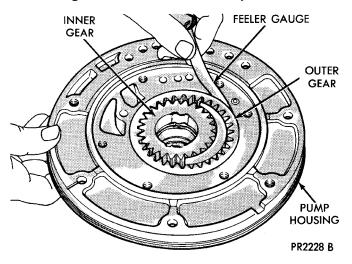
Measuring Pump Clearance (Gear to Pocket)
